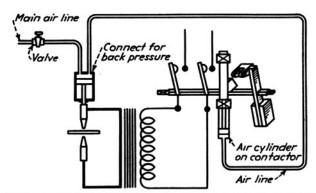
Contactor works on back pressure from the main cylinder on the welder, pressure being assured between the welding points before the welding contactor closes. When the back pressure has built up to a predetermined value, the plunger moves upward at a definite rate of speed and the hardened cam closes the main contacts. After a predetermined time, the cam moves by the roller that it engages and the main contacts open. One adjustment sets the back pressure at which the contactor plunger starts to move and therefore determines the lag in applying the current after pressure has been applied. A second adjustment changes the needle valve opening to the contactor air cylinder and thus times the upstroke. This determines the welding time. A third adjustment varies the time of the downstroke and is of importance only when used with a repeater.
